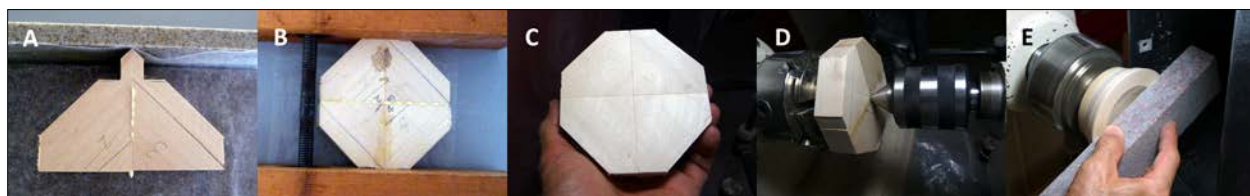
Making the foot (first layer). A: Gluing two quadrants together; B: Gluing two halves together after the facing surfaces are trued up; C: One side sanded flat on a disc sander; D: Tailstock used for centering/holding onto the waste block after glue is applied; E: Truing up the first layer. Note the center has been dished out for easy truing.
